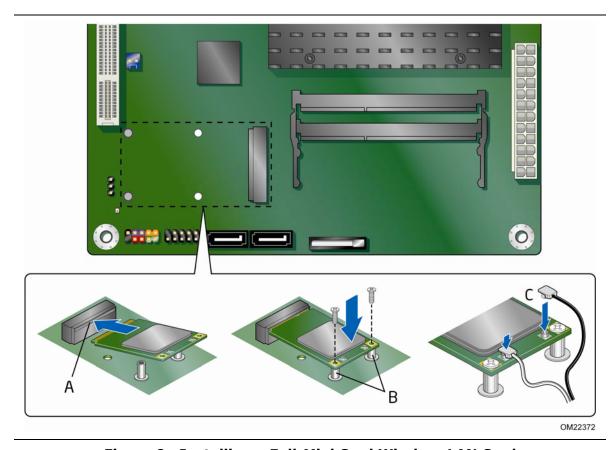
Installing a Full-Mini Card Wireless LAN Card
